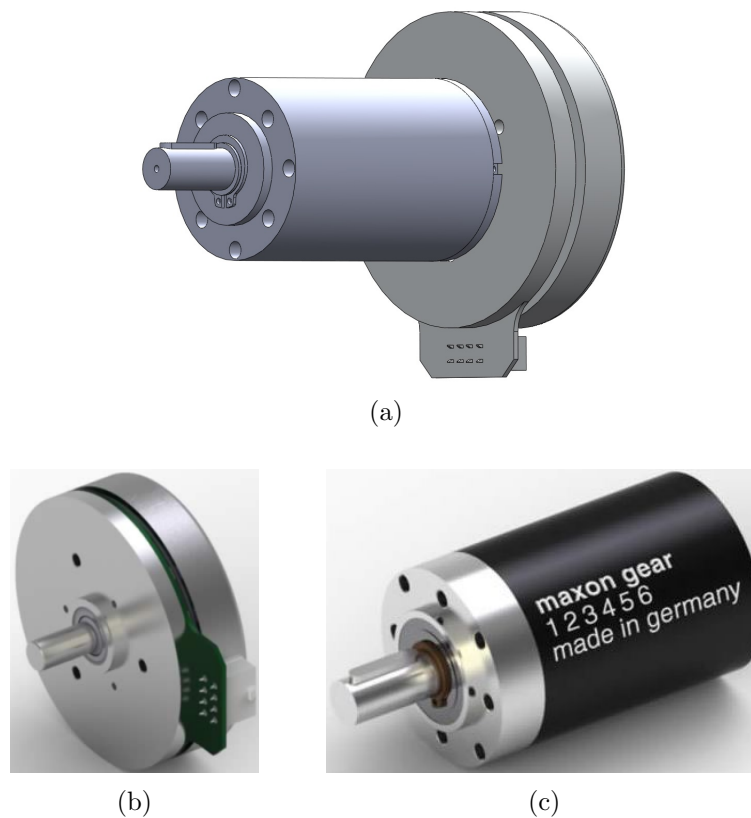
a) CAD assembly of Maxon EC-90 with a 66:1 Gearhead b) Real Maxon EC-90 c) Real 66:1 Maxon Planetary Gearhead GP 52
